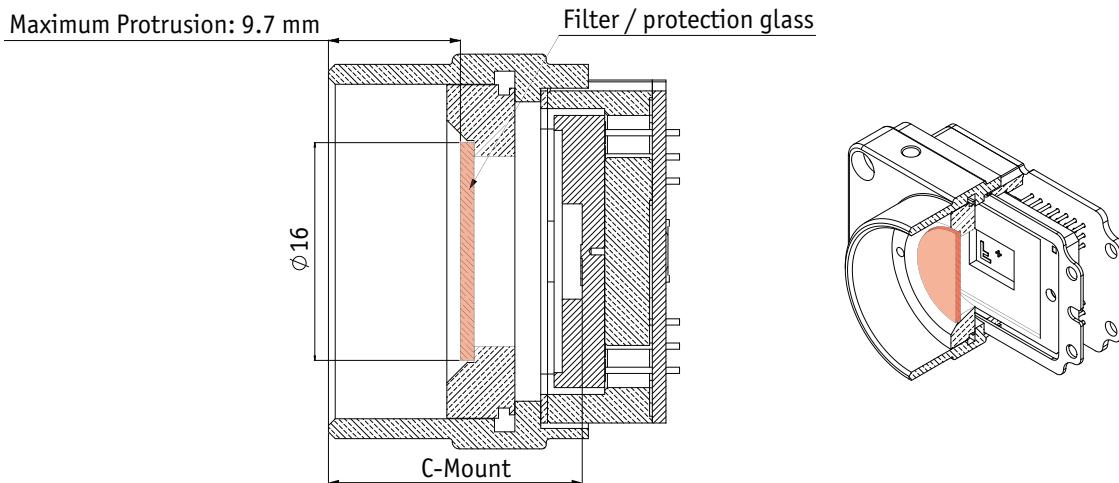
C-Mount dimensions (16 mm filter) for Manta G- 235 / 282 / 283 / 505
